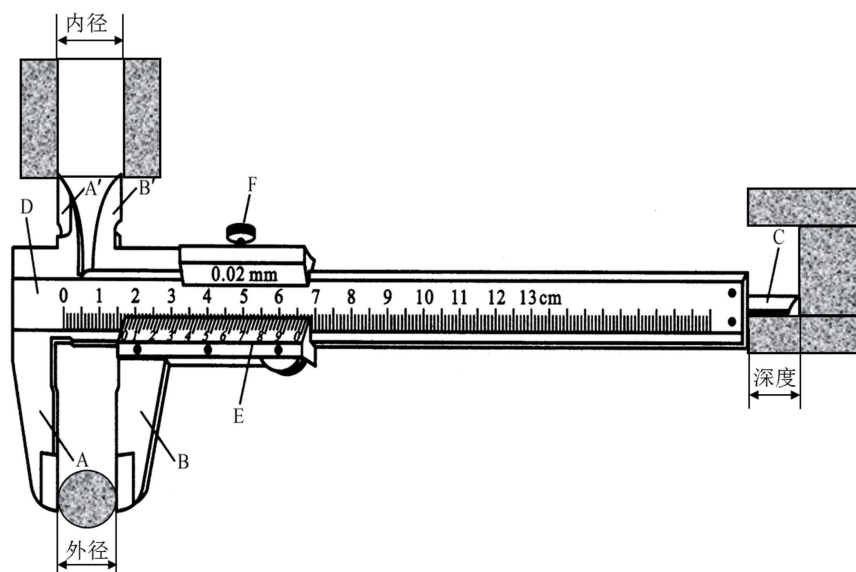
Measuring external diameter, internal diameter and depth with vernier caliper
